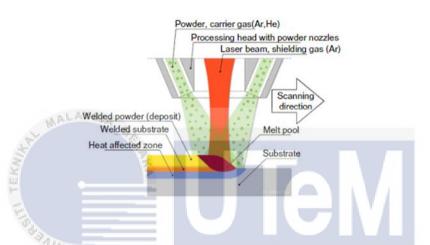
Schematic drawing of the laser cladding process head (Zhu et al., 2021)
